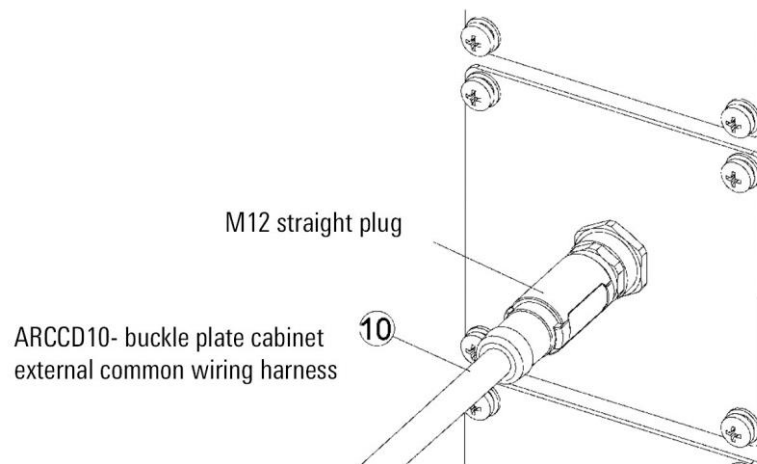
ARCCD10- shared wiring harness outside the buckle board cabinet
